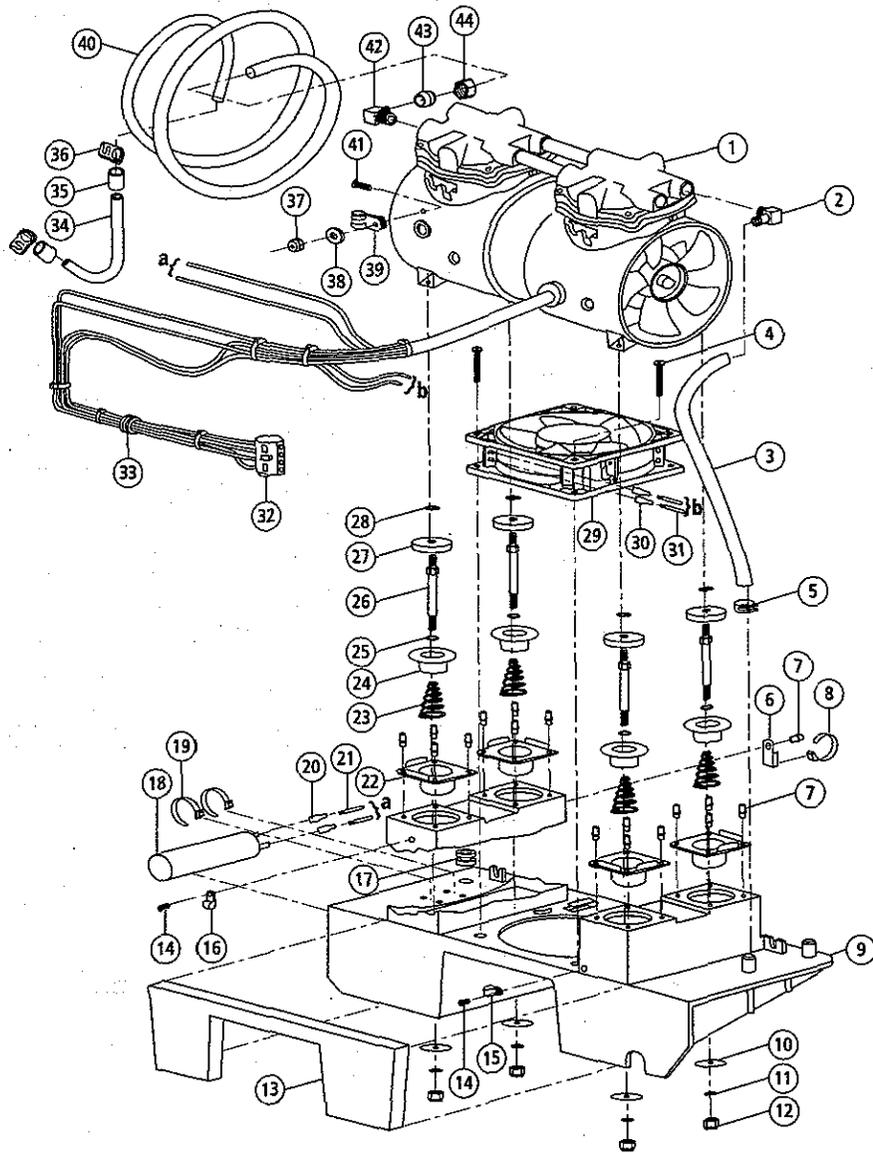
2619 Thomas Compressor Platform Assembly, Drawing A
